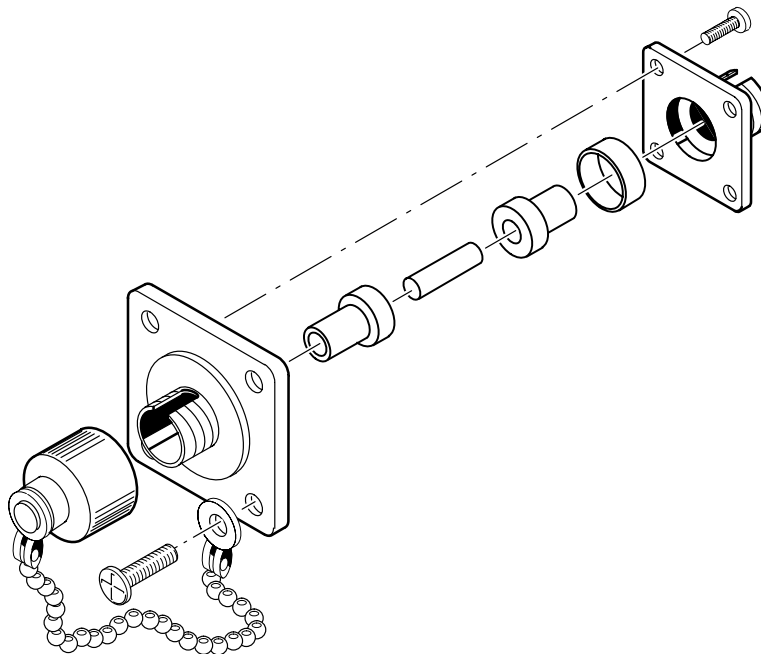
Removing the Optical Bulkhead Connector.
